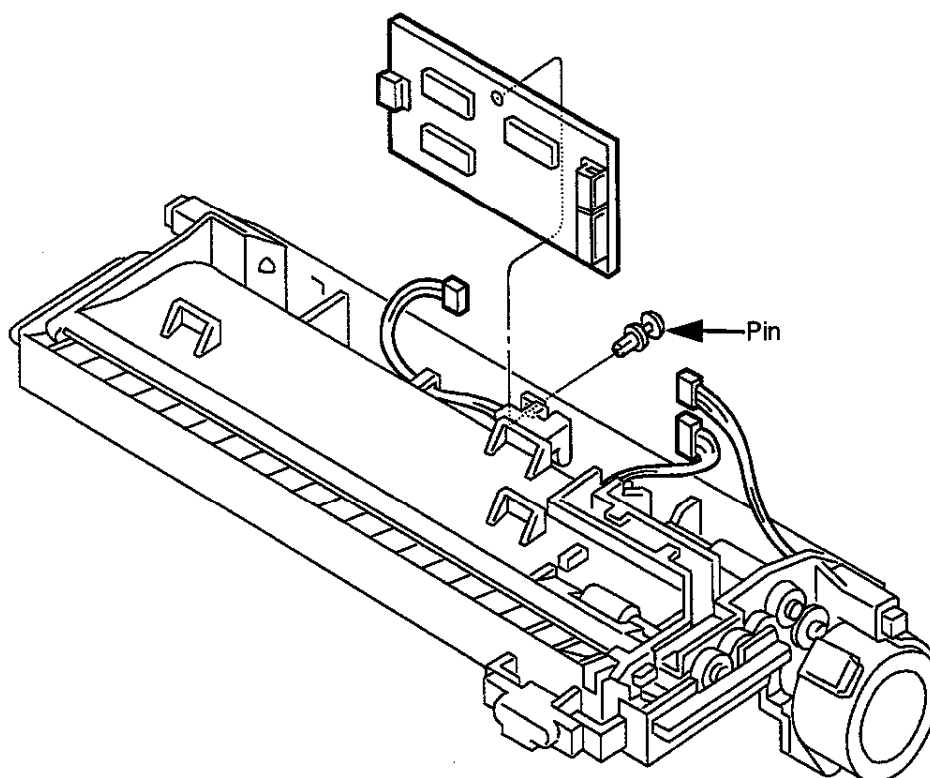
Removing the Duplex PWB Assembly
